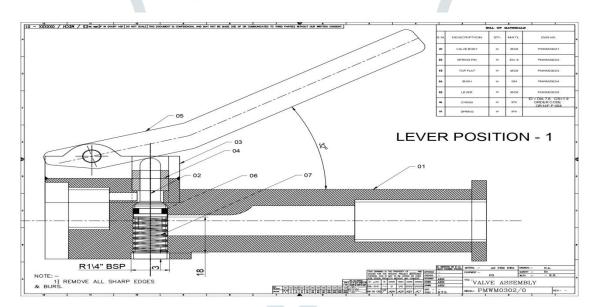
Sample Product drawing: Pneumatic manual flow control valve (M/s Lakshmi Machine Tools, Indore) 3.7Conclusion and Future Scope-
